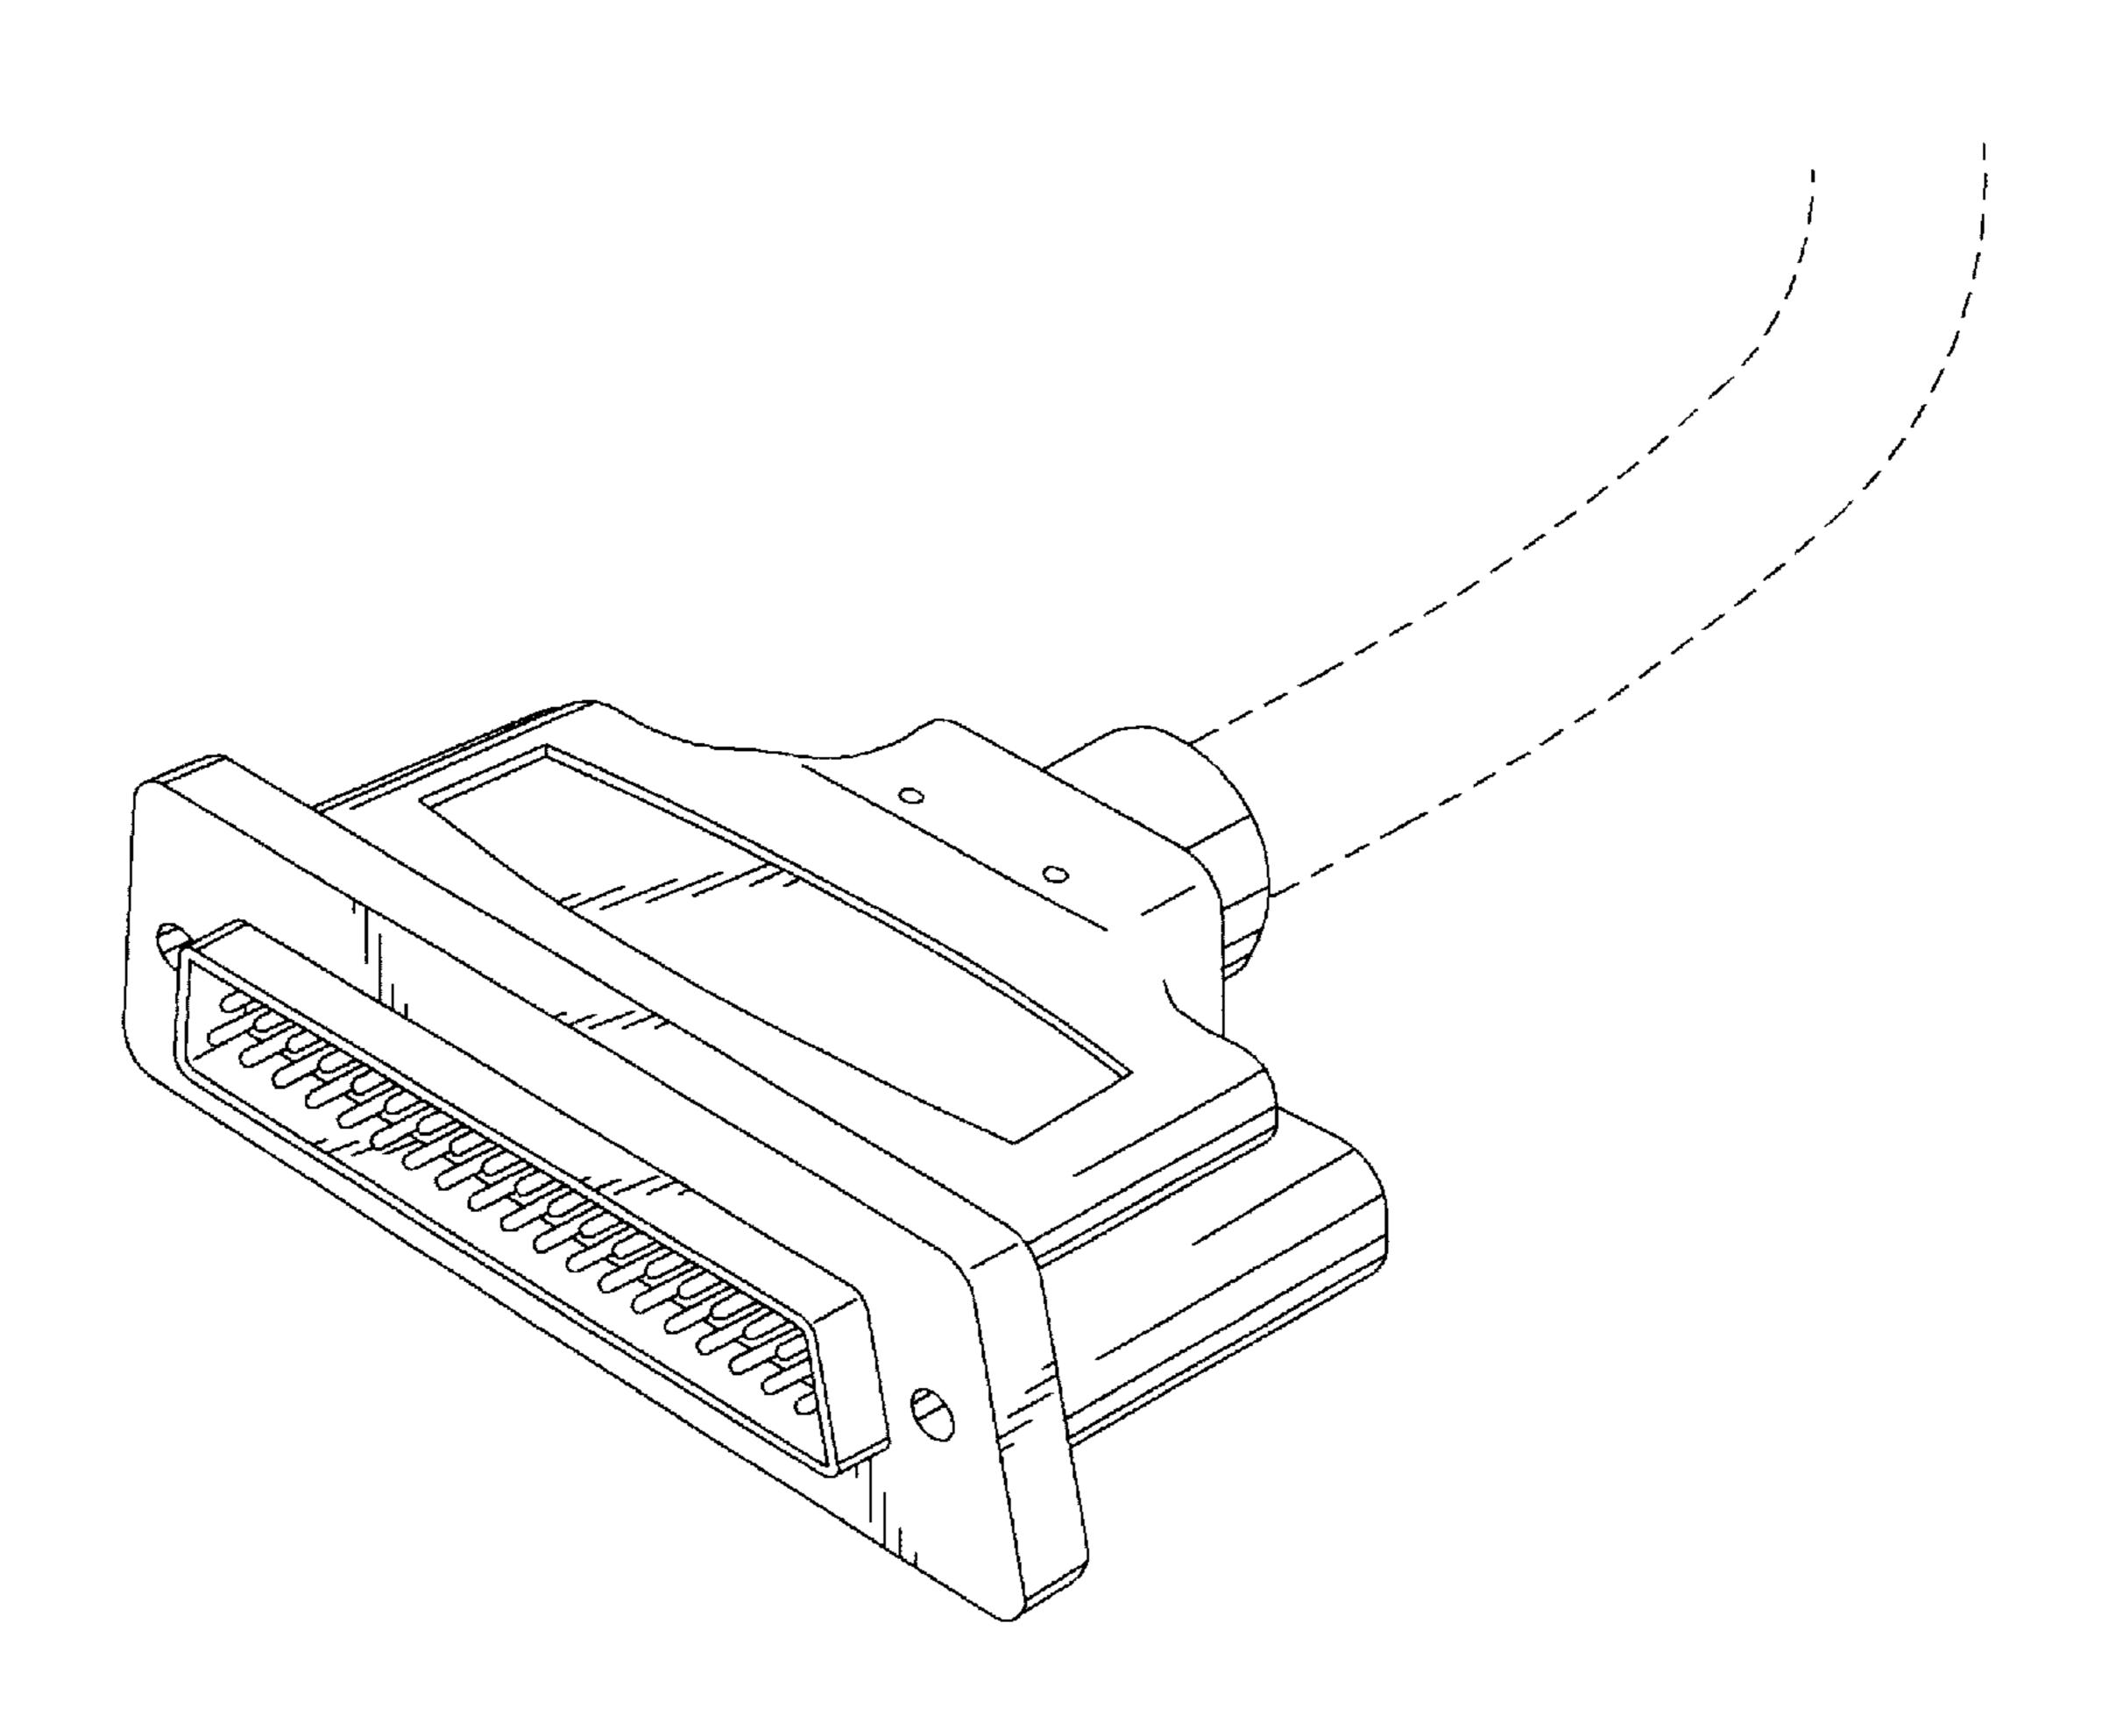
is a perspective view of the electrical signal cable connector shown in FIG. 1, taken from the bottom and rear, with the cable shown in phantom;
